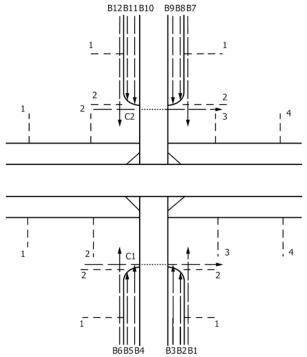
Scans of the Horizontal Weld into a Cut Out
